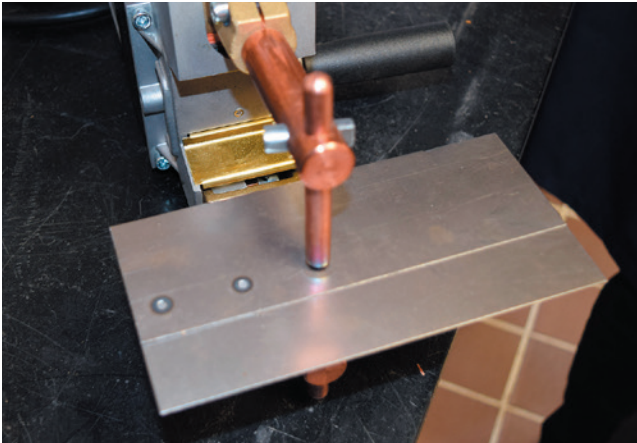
Each weld should be spaced no less than 25 mm apart.
